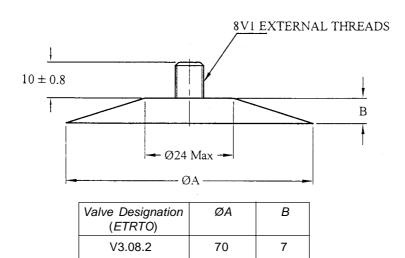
Screw-on Universal Tube Valve Head Shape Truck and Bus Valve
